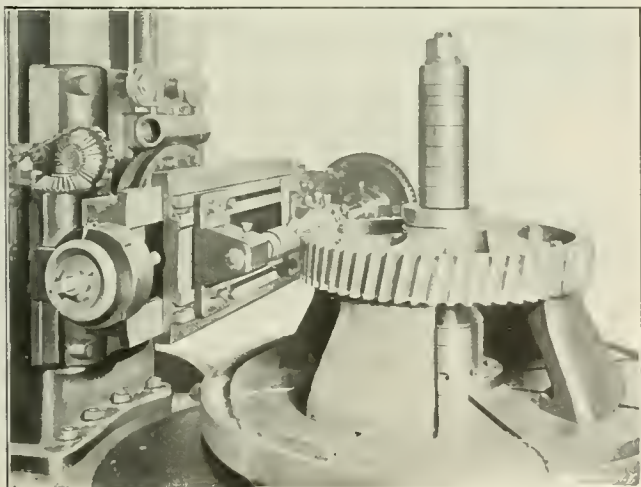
Worm-wheel Hobbing Attachment equipped with Fly-cutter
